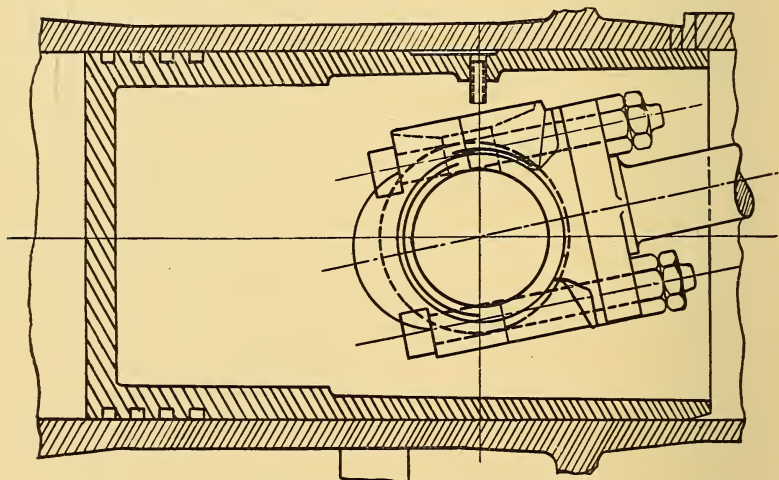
Typical Gas Engine Piston and small end of Connecting Rod.
